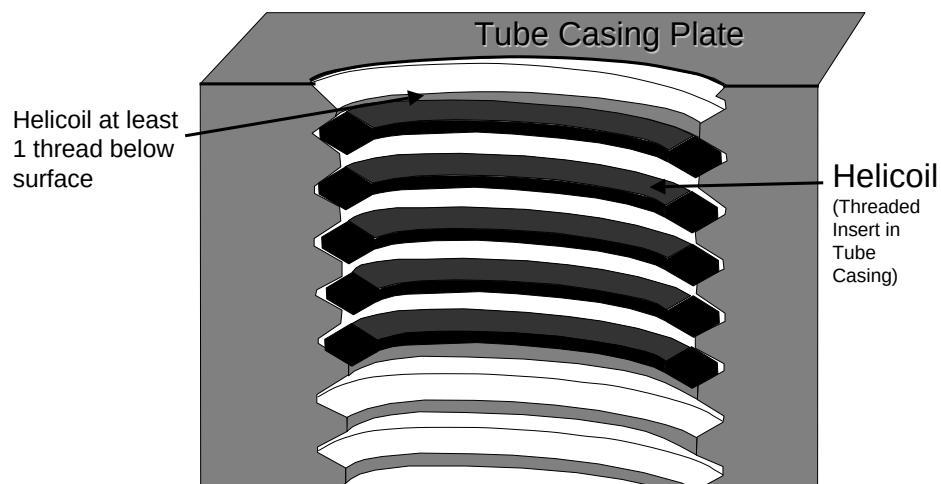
Cross-section of tapped hole with Helicoil Insert
